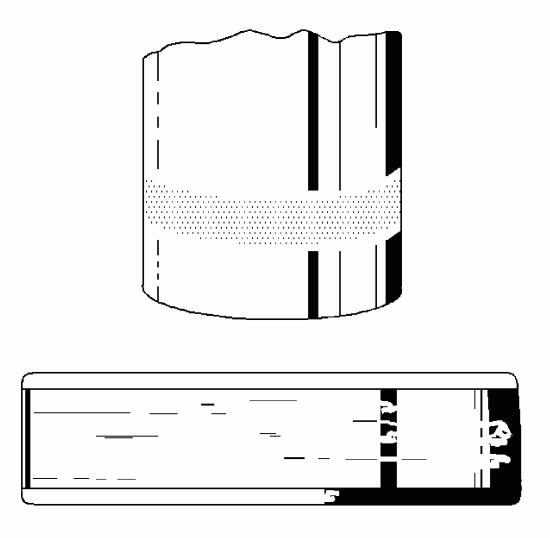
Identifying Frettage Courtesy of GENERAL MOTORS CORP.
